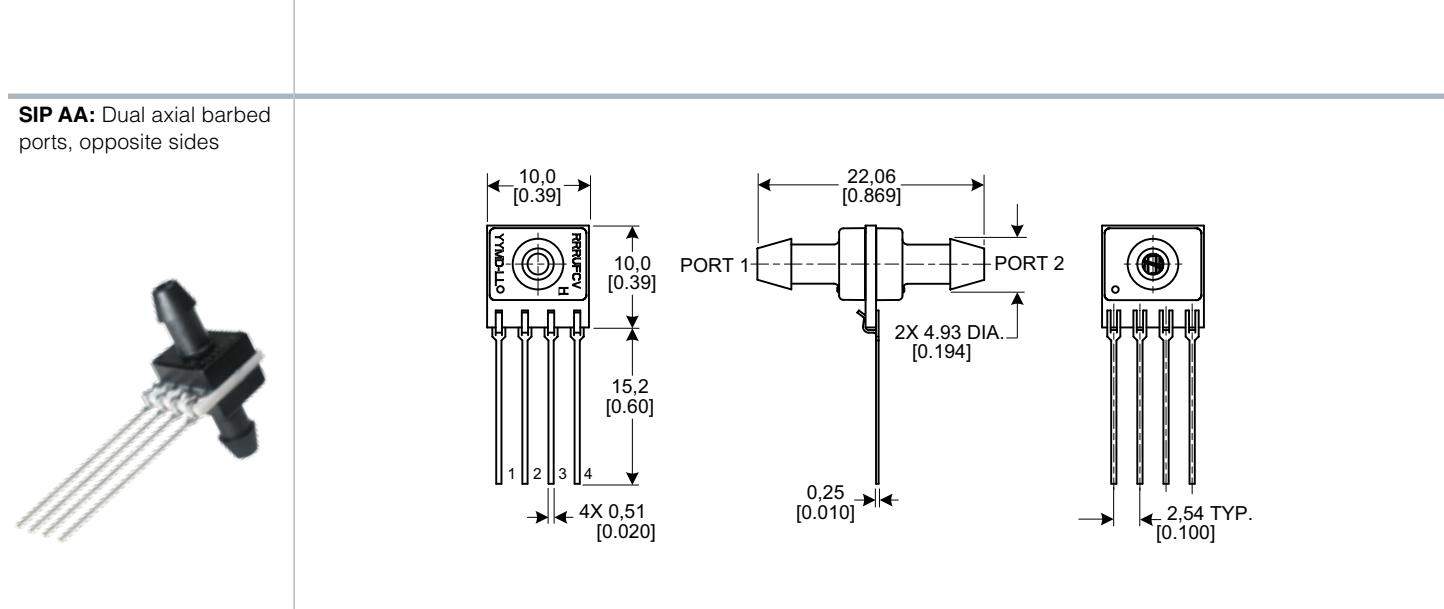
SIP Package Dimensional Drawings (For reference only: mm [in].)
